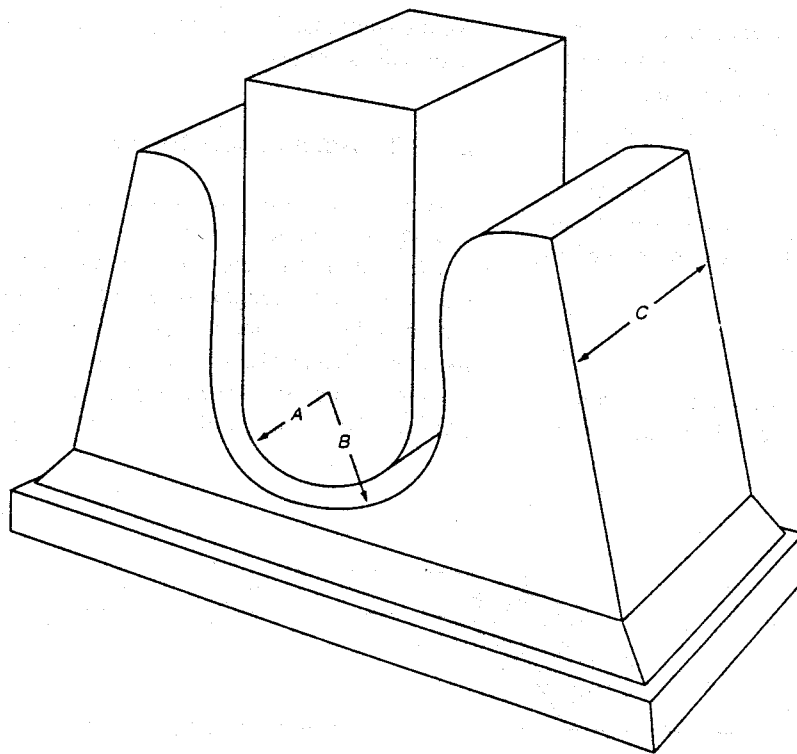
Dimensioning of Discontinuities in Weld Specimens
